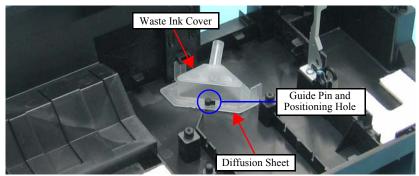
Removing Waste Ink Cover and Diffusion Sheet
